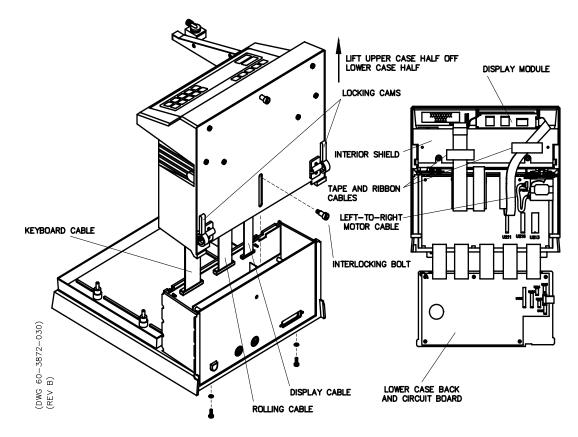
Cable Locations on Circuit Boards, Case Disassembly
